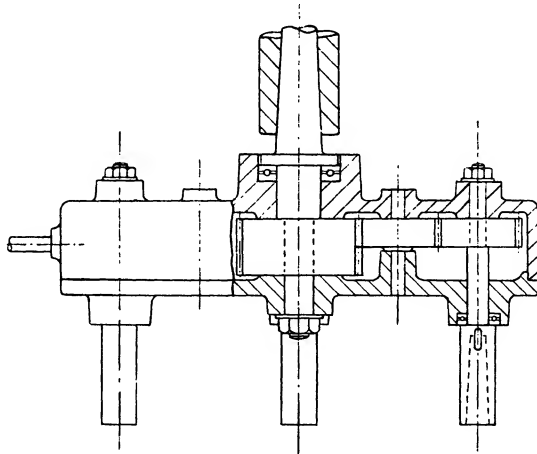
MULTI-SPINDLE DRILLING HEAD ON A SINGLE SPINDLE MACHINE
